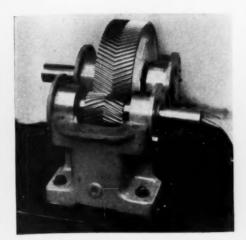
Speed reducer featuring herringbone-Maag gears mounted in roller bearings
